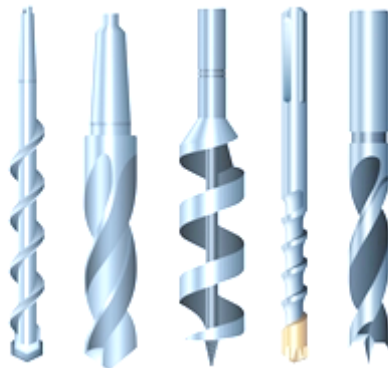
improperly clamped workpieces could travel upward along screw shapes of drill bits (Source - <http://www.carbideprocessors.com/pages/technical-info/types-of-drill-bits.html>)
